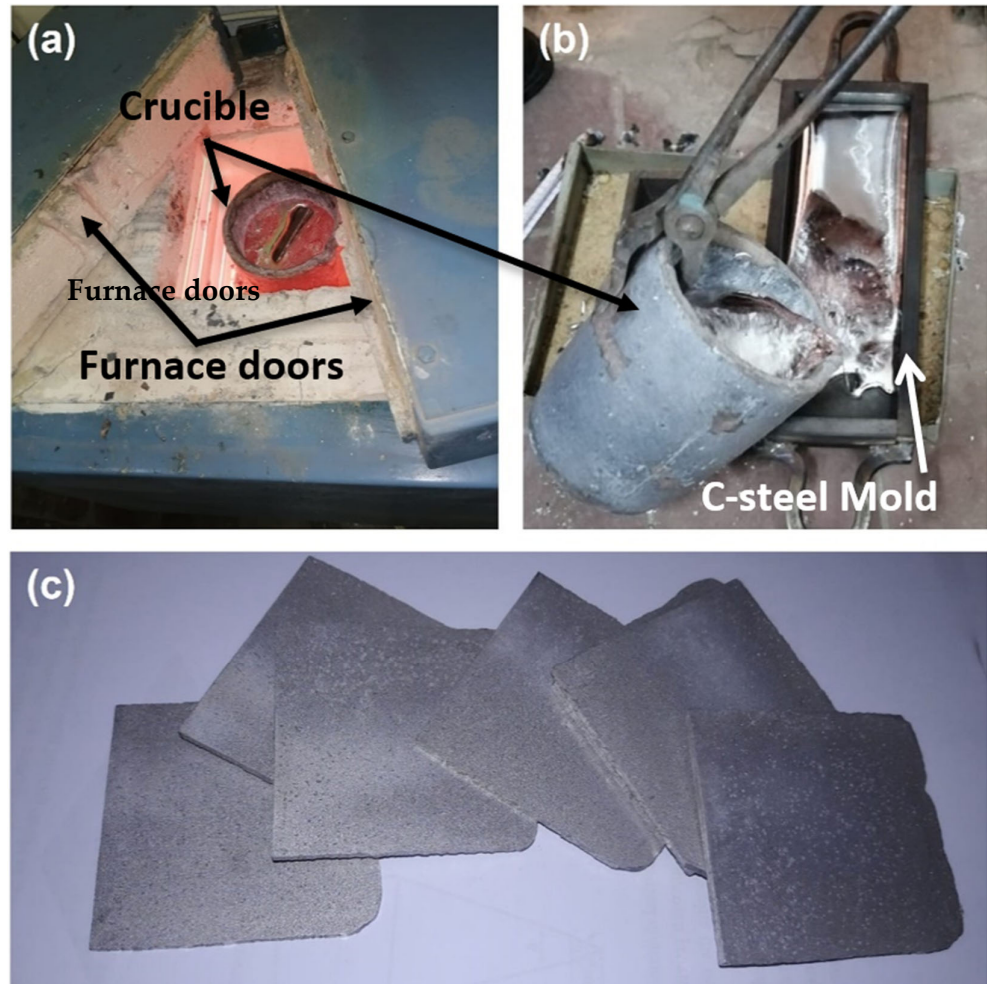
Preparation steps of the A356 Al-alloy sheet plates: (a) the as-received ingot melted in an electrical furnace, (b) the molten metal poured inside the steel mold, and (c) the sheet plates cut by EDM.
